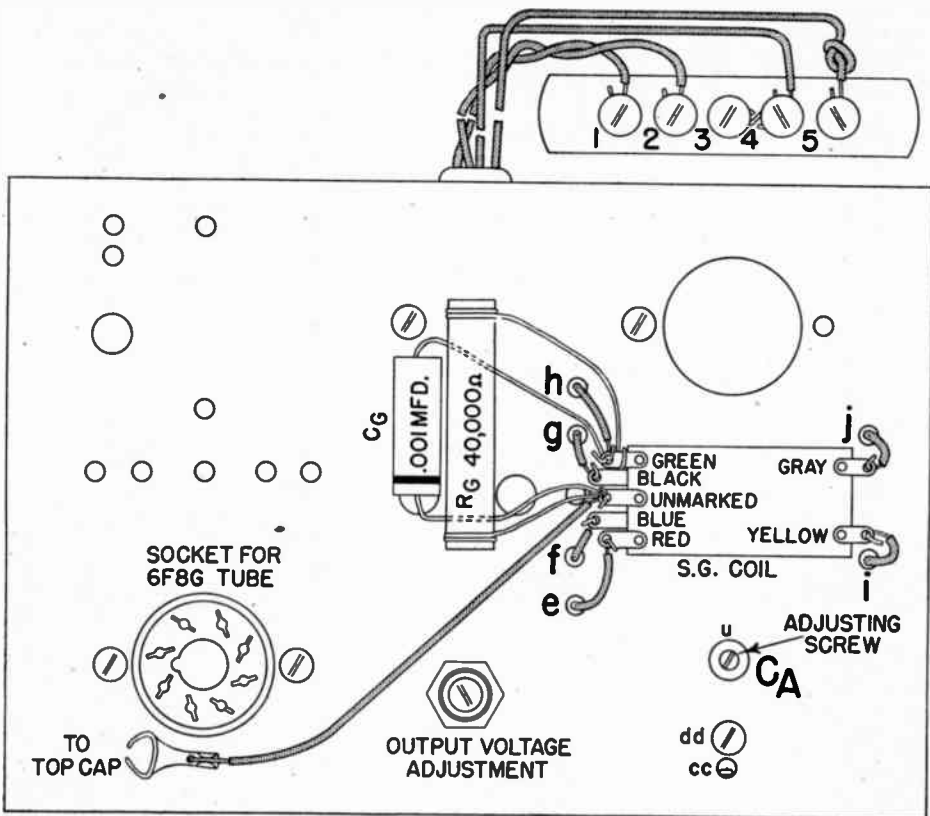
Top view of the r.f. oscillator chassis furnished to you in Radio Kit 5RK-1, showing parts and connections as they should be made for the r.f. oscillator which you assemble in Experiment 44.
